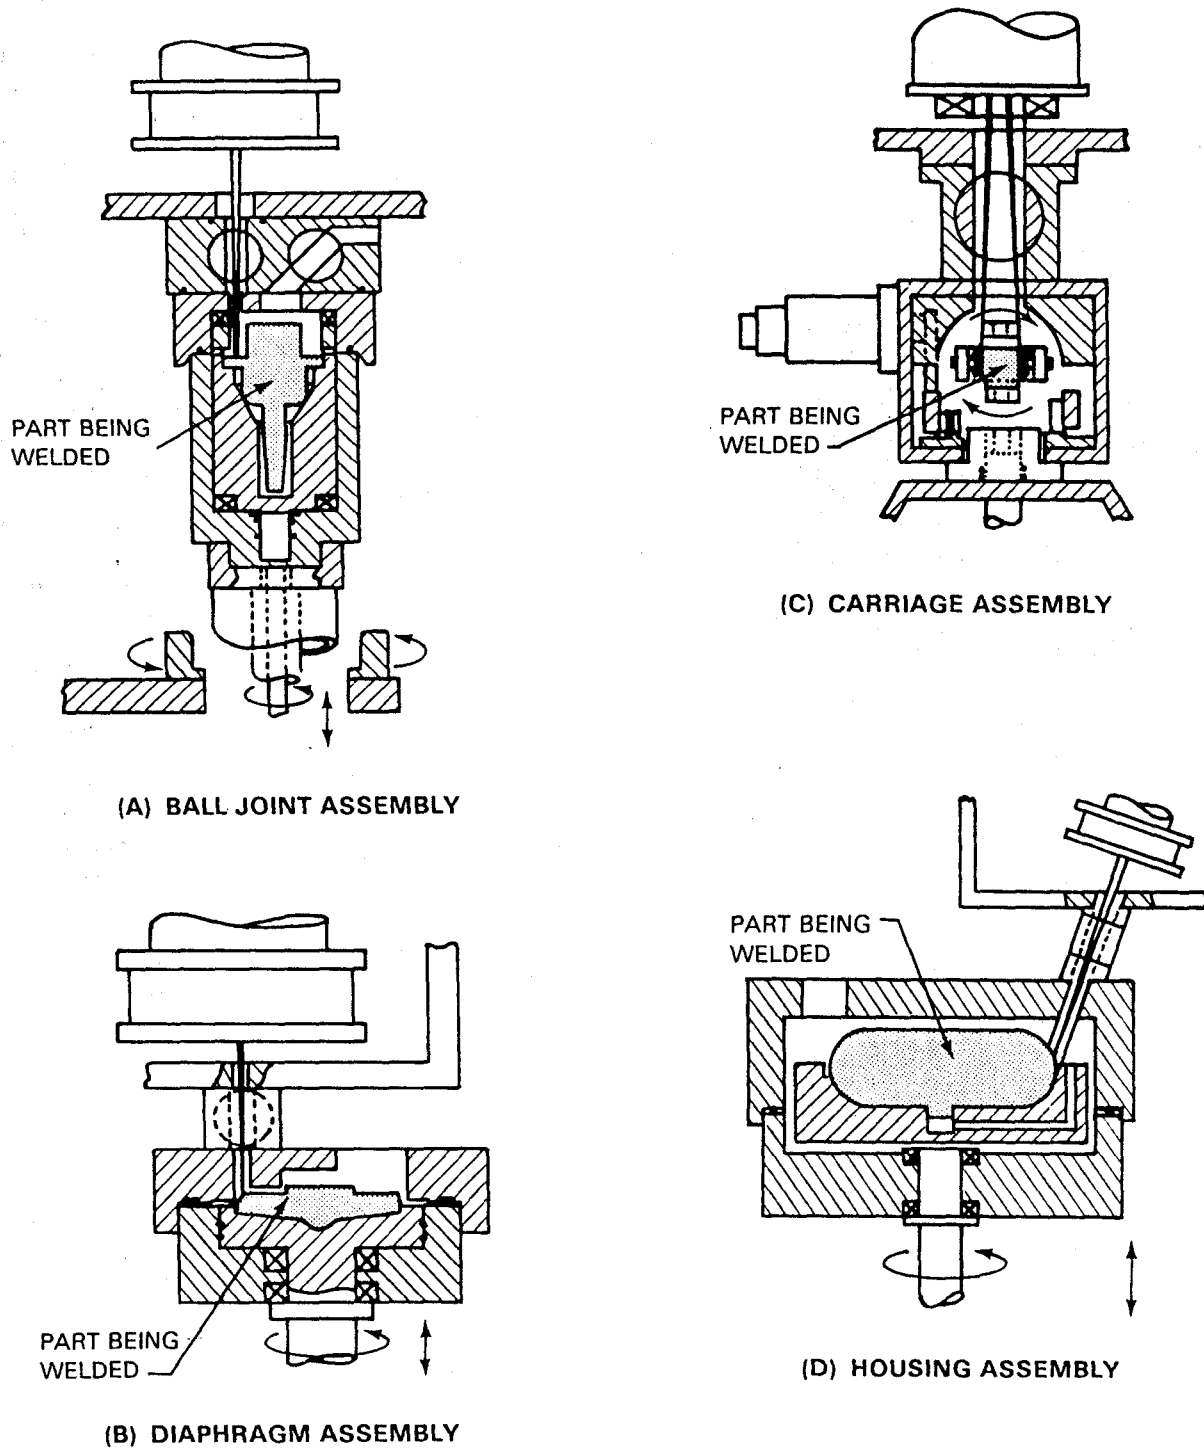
Typical Tooling Concepts in Special Purpose Medium Vacuum Electron Beam Welding Machines
